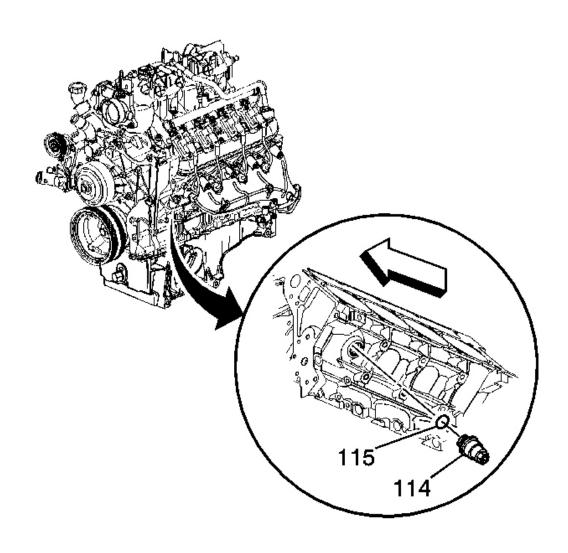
Engine Block Coolant Heater Courtesy of GENERAL MOTORS CORP.
